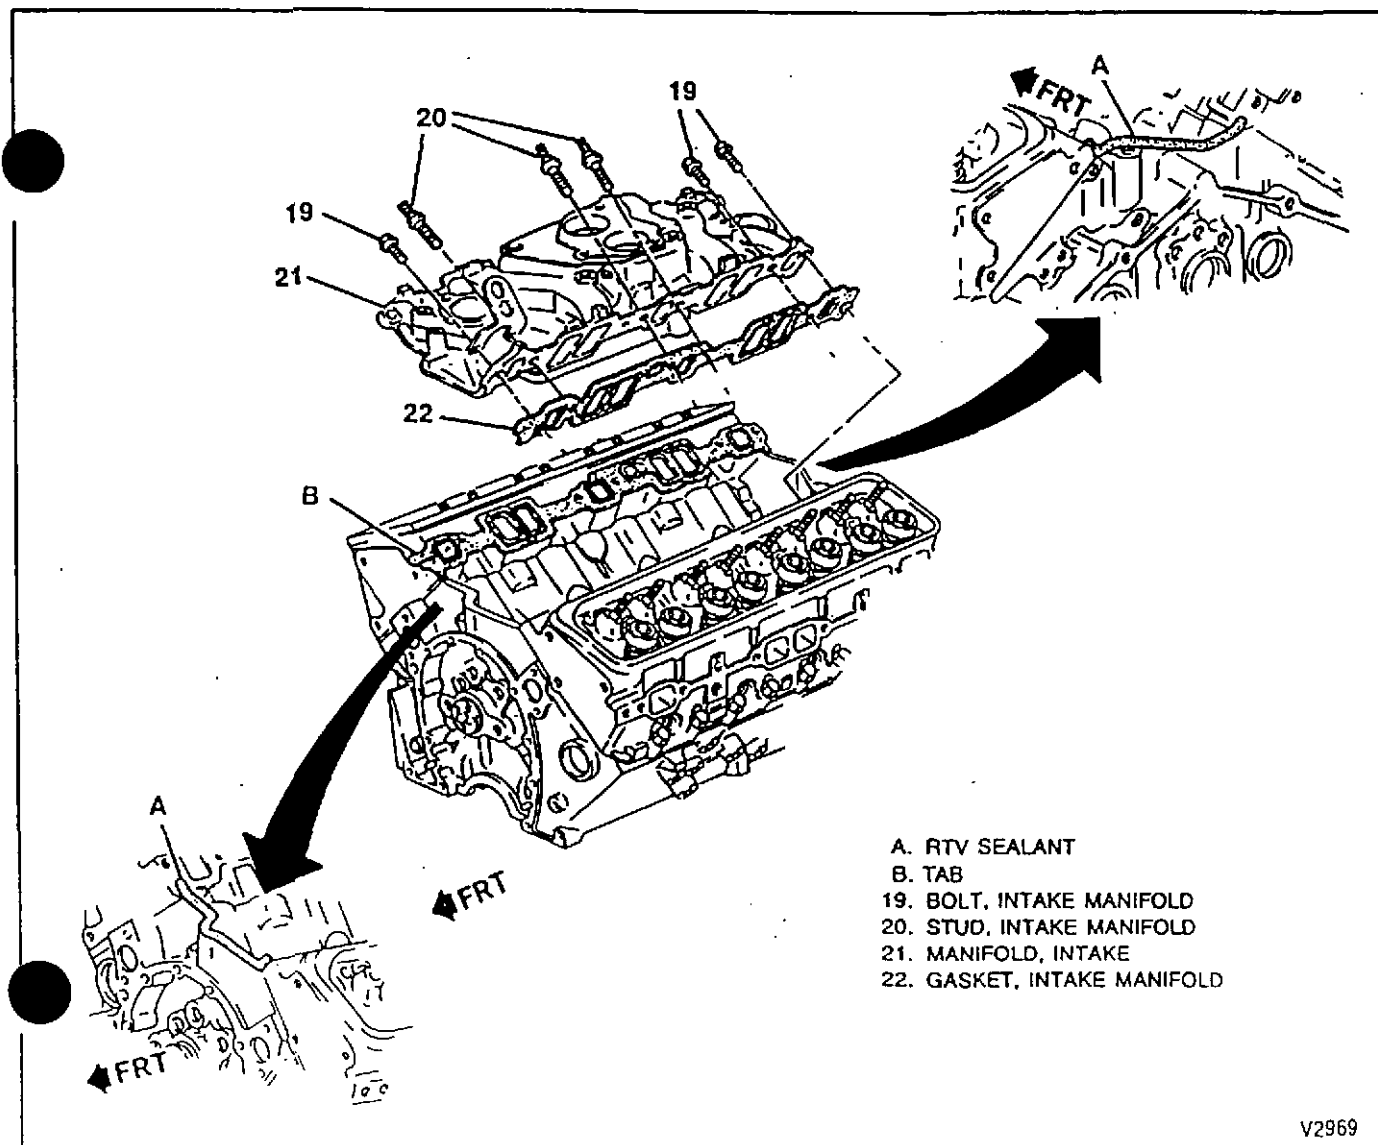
Intake Manifold (5.0L and 5.7L Engines)
